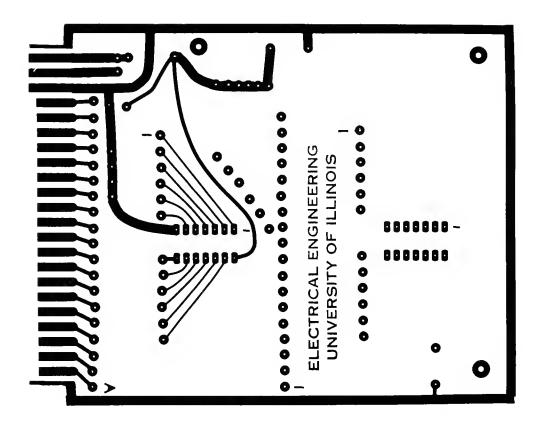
(a). General Circuit Test Board Printed Circuit Layout. Top Side.
